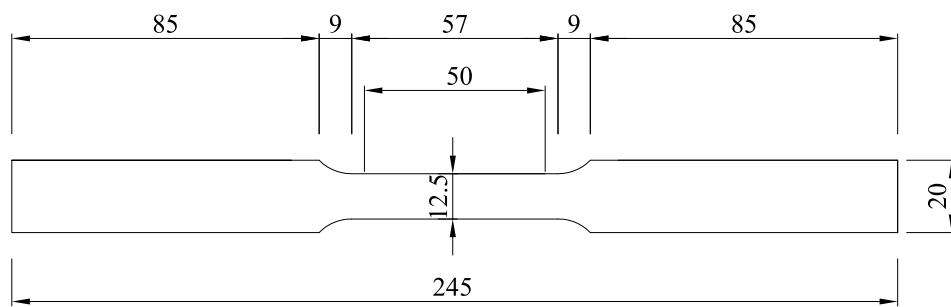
Dimensions of tensile coupon (dimensions in mm)
